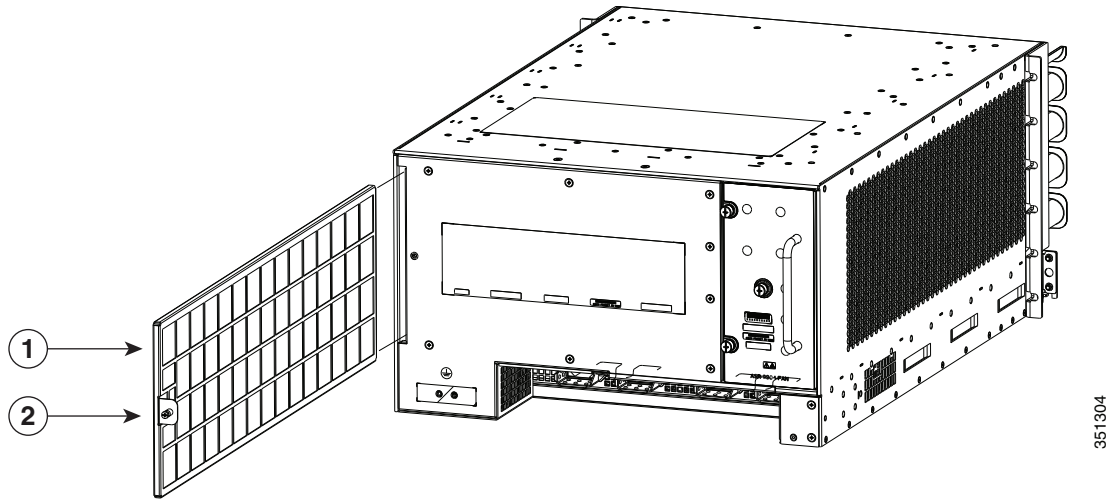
Cisco ASR 9006 Router Chassis Air Filter
